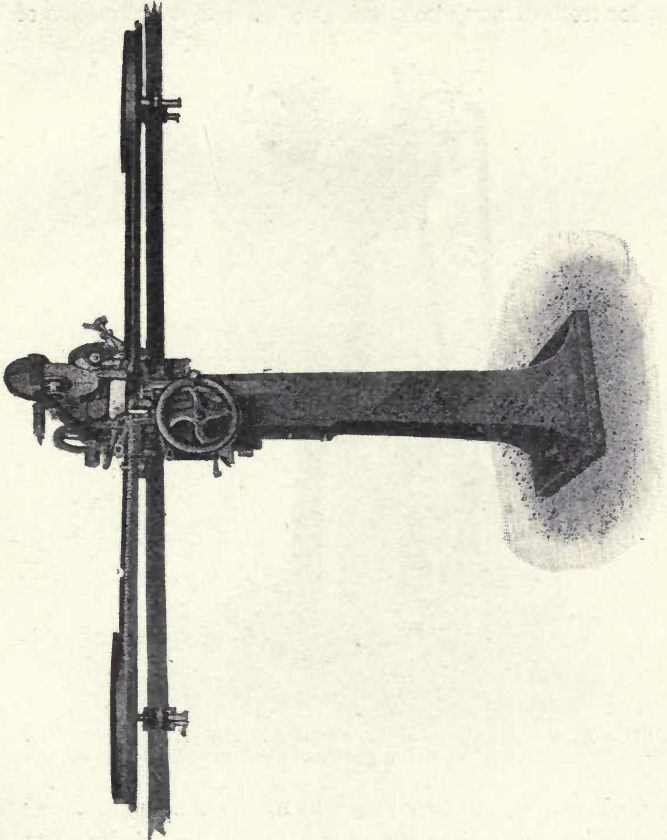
Automatic Saw-sharpening Machine for Straight Cut, with Setting Device.
